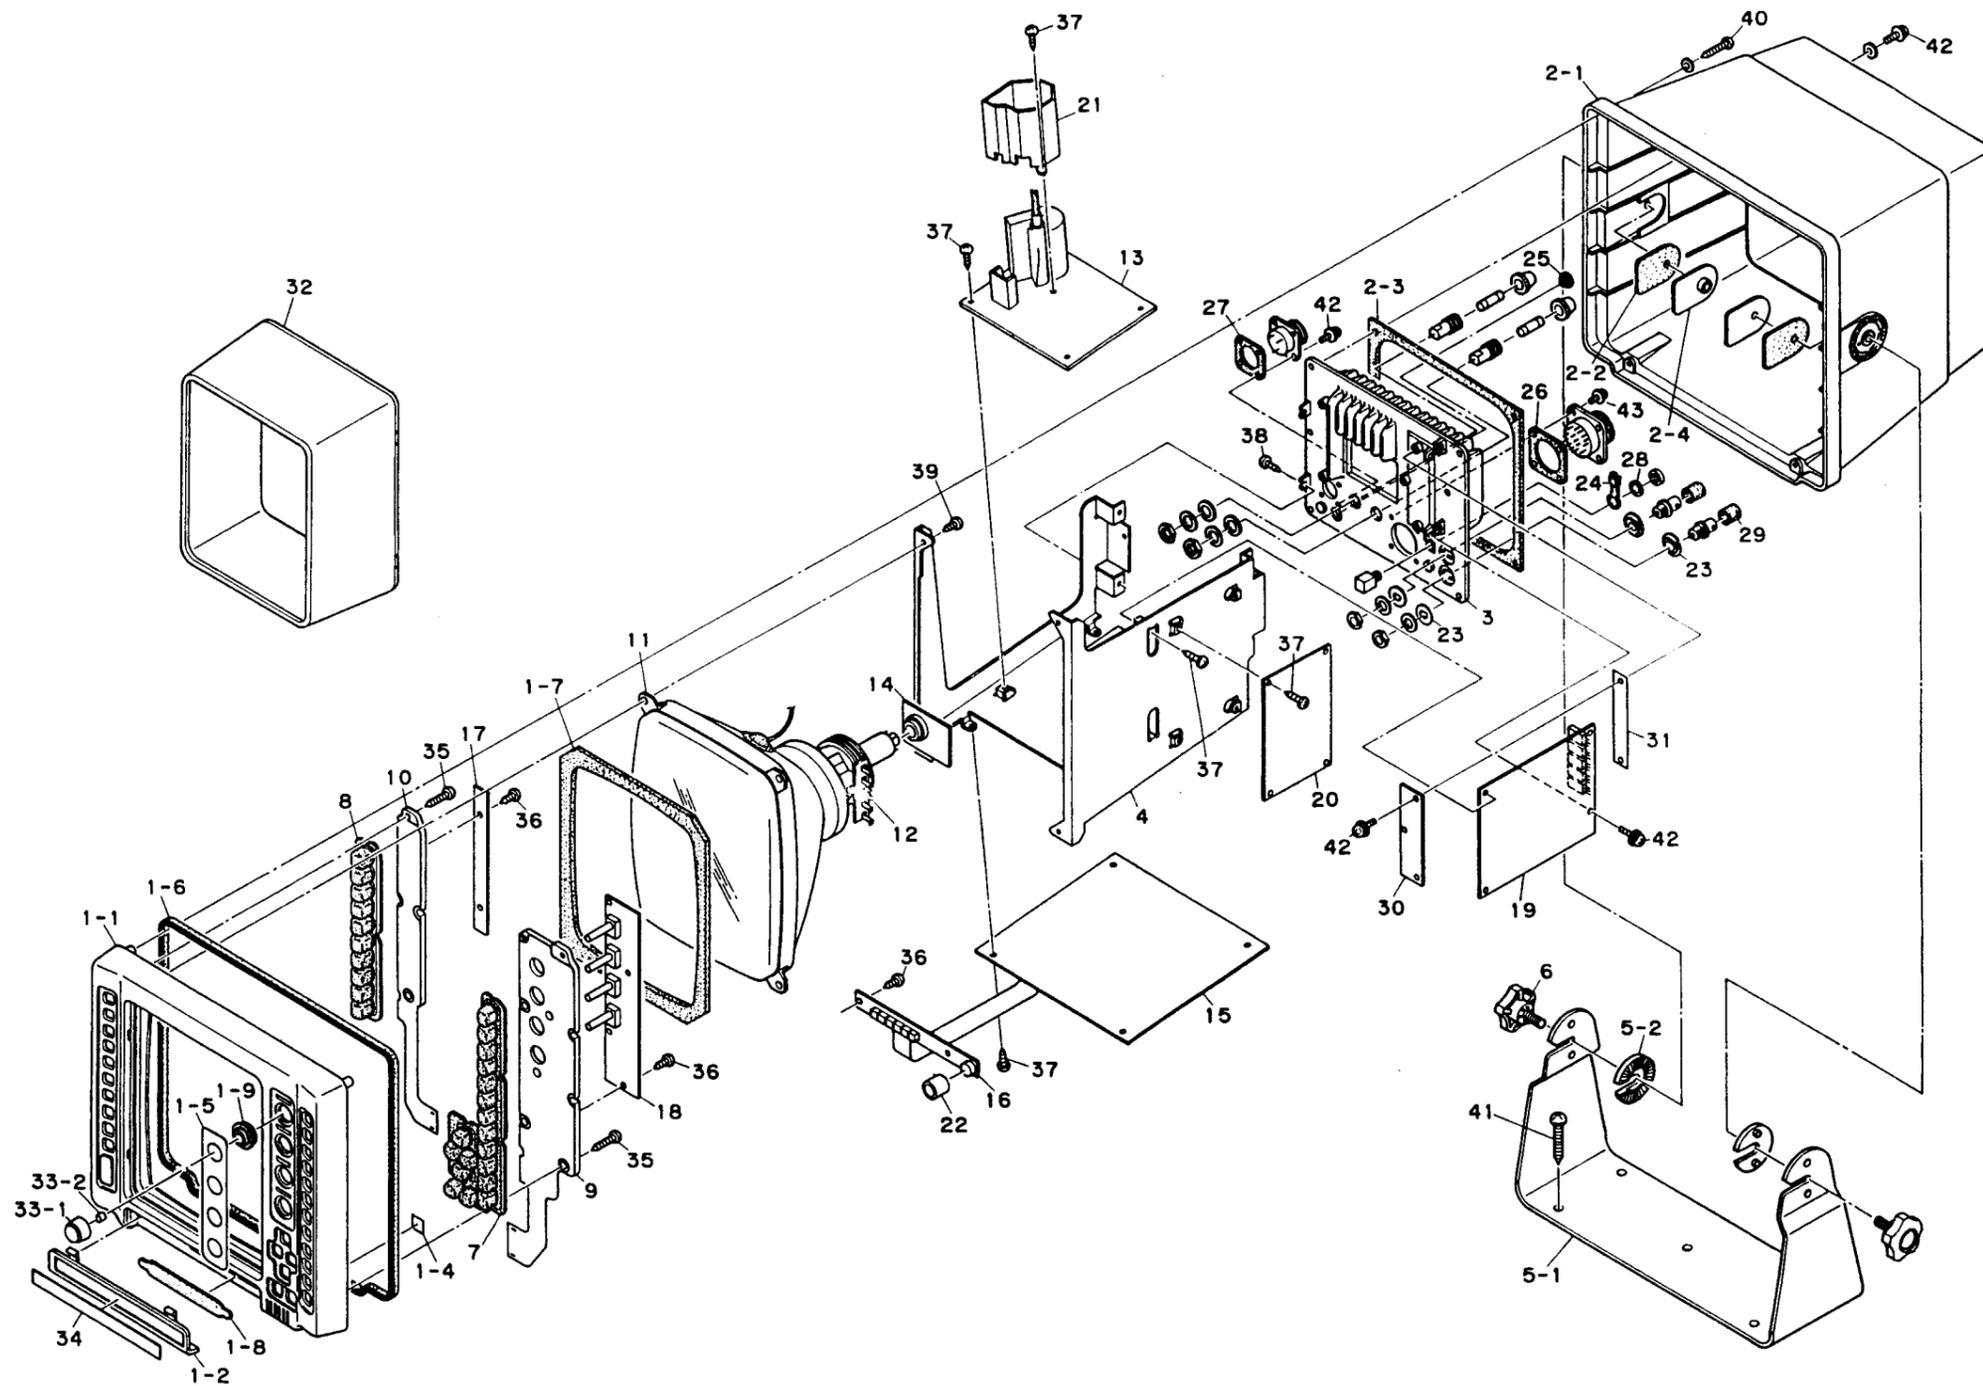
ASSEMBLY DRAWING OF DISPLAY UNIT
